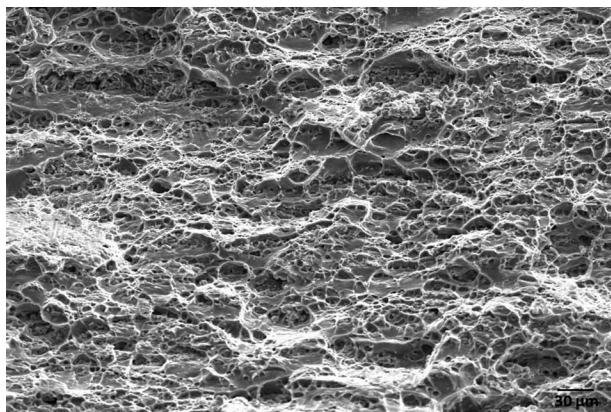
Fracture surface of the specimen shown in Fig. 77 taken at higher magnification. Note the presence of fine equiaxed dimple throughout
